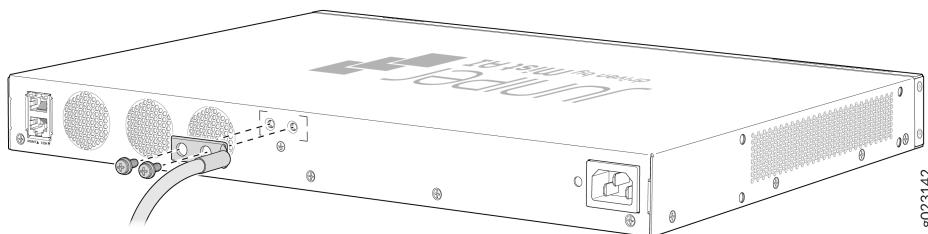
Connect a Grounding Cable to an EX4000-48MP Switch
